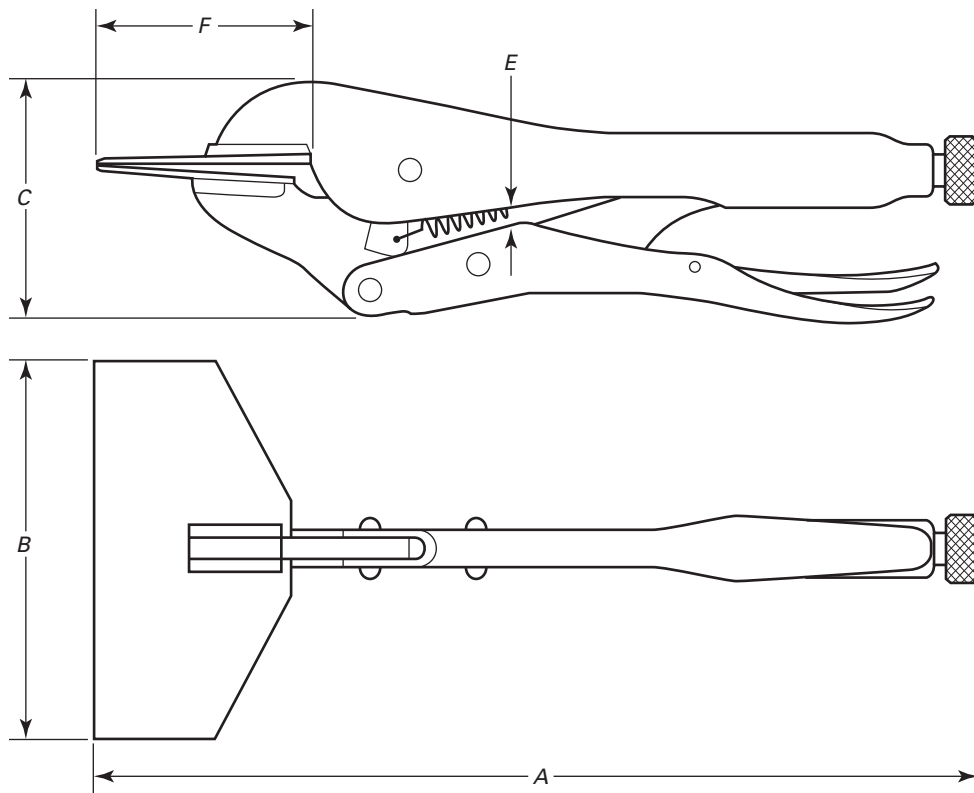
Type II, Class 3, Welding Clamp
